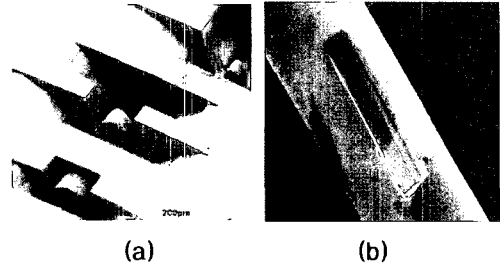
Samples formed surface debris on excimer laser ablation (a) 3D machining, (b) Notch ablation (Exitech).
